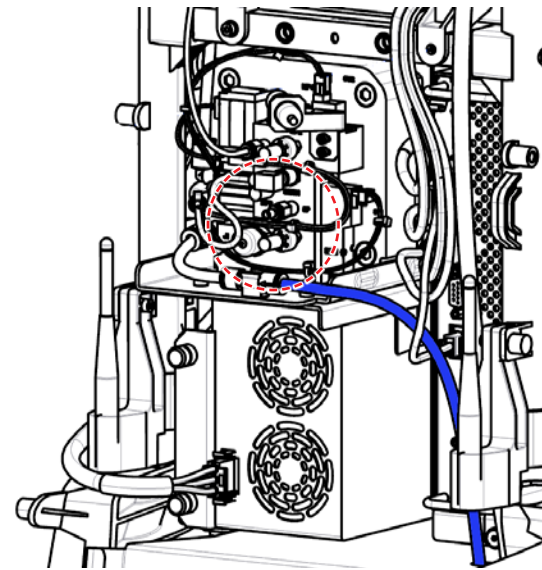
Pneumatic Tubing Connecting Pneumatic Manifold and Vit Pump
